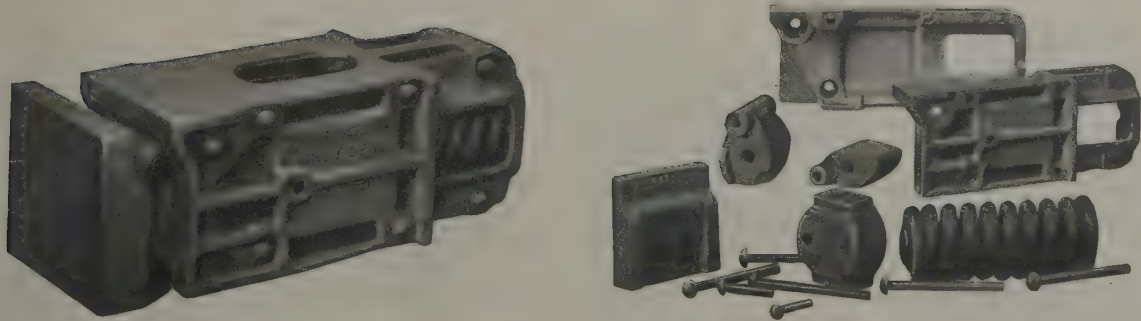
McCord Draft Gear, Type D. McCord & Company.
